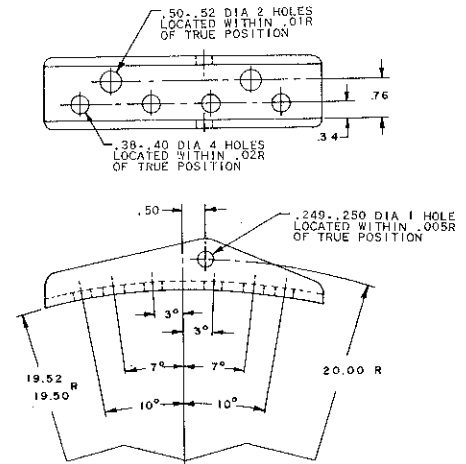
This illustrates that true position dimensions can be used to locate different patterns of holes on the same part with a combination of angular and linear dimensions.
